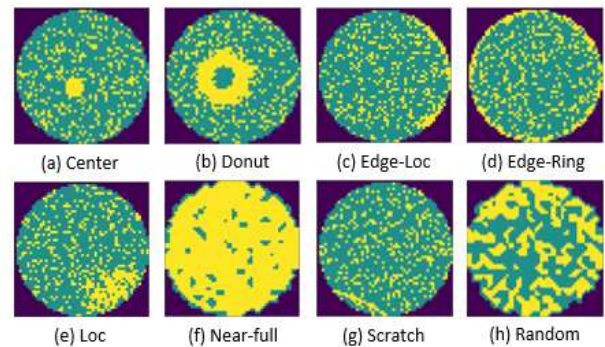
Single wafer map defect: (a) Center (C); (b) Donut (D); (c) Edge-Loc (EL); (d) Edge-Ring (ER); (e) Loc (L); (f) Near-full; (g) Scratch (S); (h) Random.
